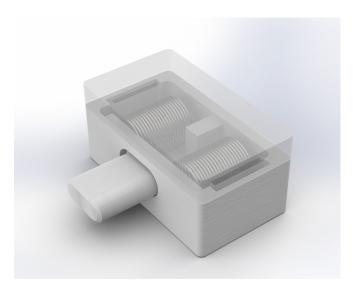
The proposed screw-less assembly mechanism: it consists of three components with two springs orientated in the direction of the pin placed under the enclosure cover.
